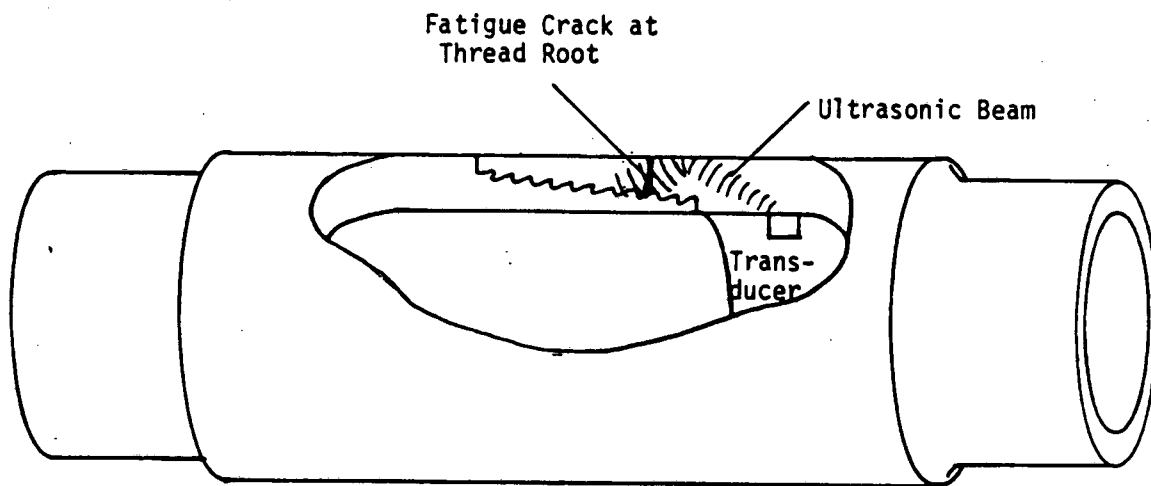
Threaded connector example of tension leg tendons with fatigue crack at root of thread.
